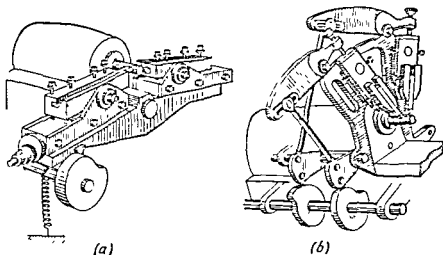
Arrangement of tool rests and rocker slide in Swiss-type automatics.
